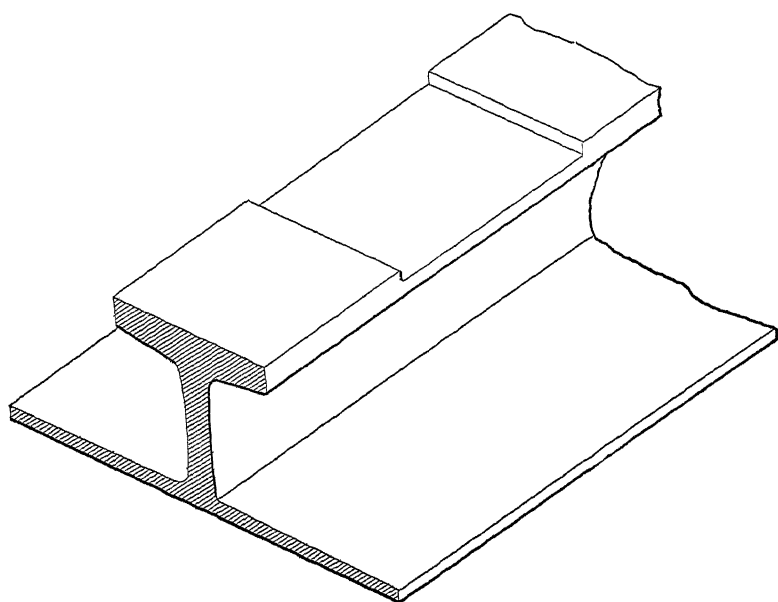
TIE-SECTION WITH RECESS FOR RAIL, ROLLED BY TRANSVERSE MILL.
